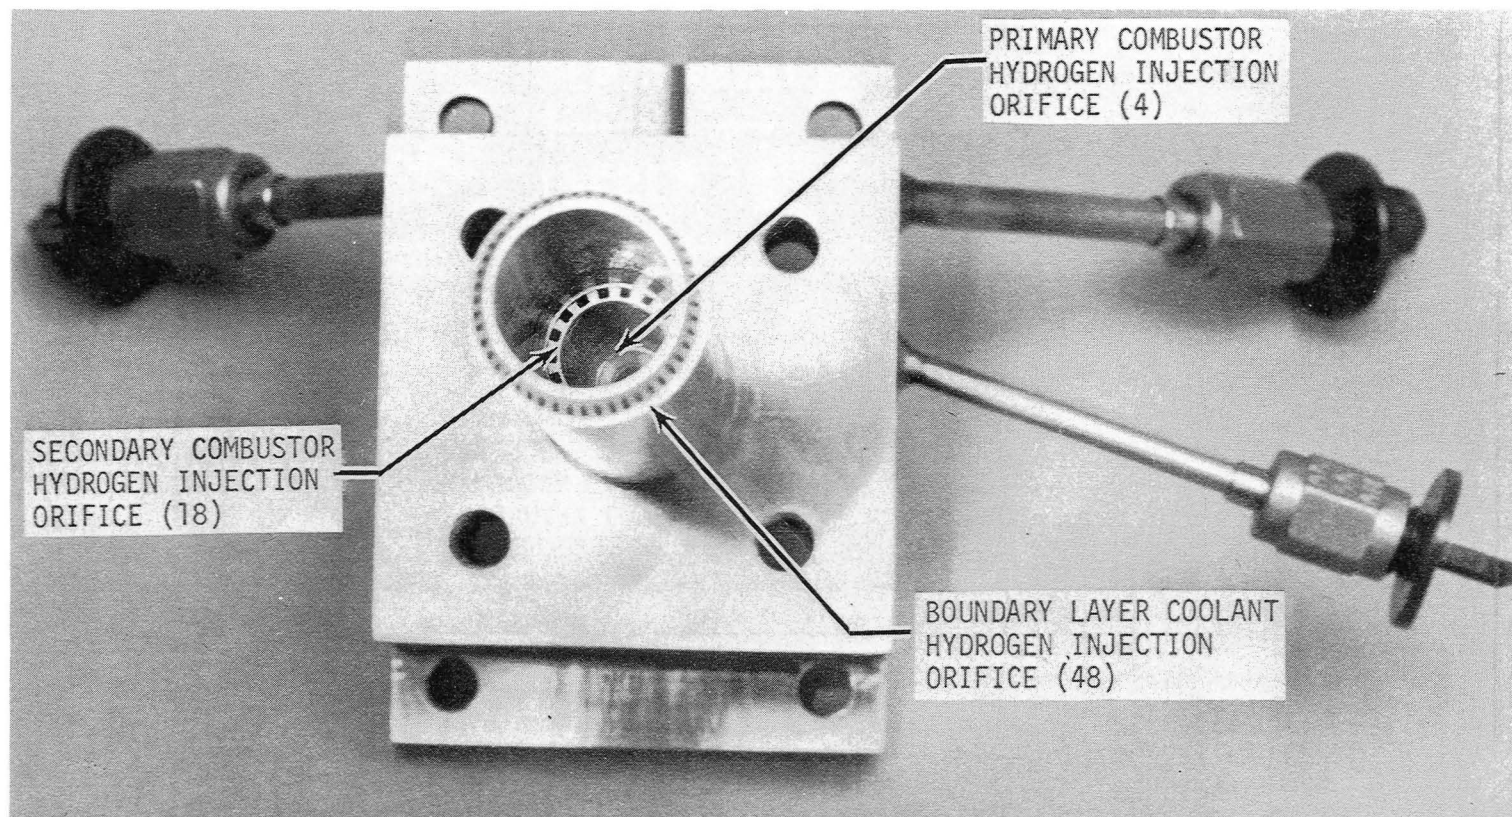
Combustor Sleeve Assembly After Final Coolant Channel Closeout
